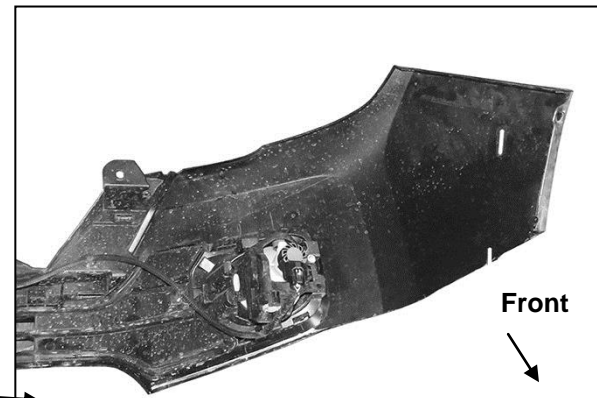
Mark passenger/right side outer location below notch on bumper cover flange
